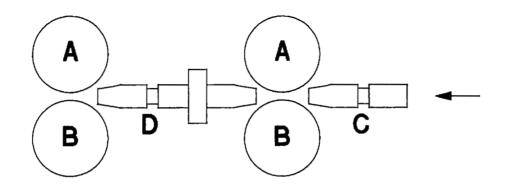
W31-0 FOUR ROLL DRIVE ASSEMBLY
